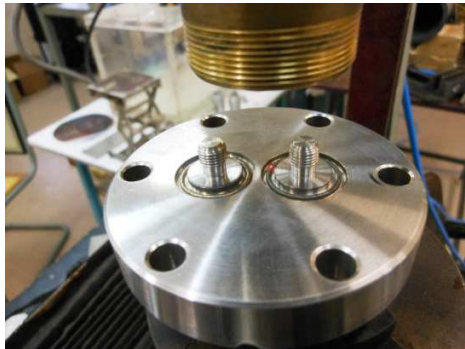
Nd:YAG laser welding of sample SMA feedthrough for optimization of laser parameters.
